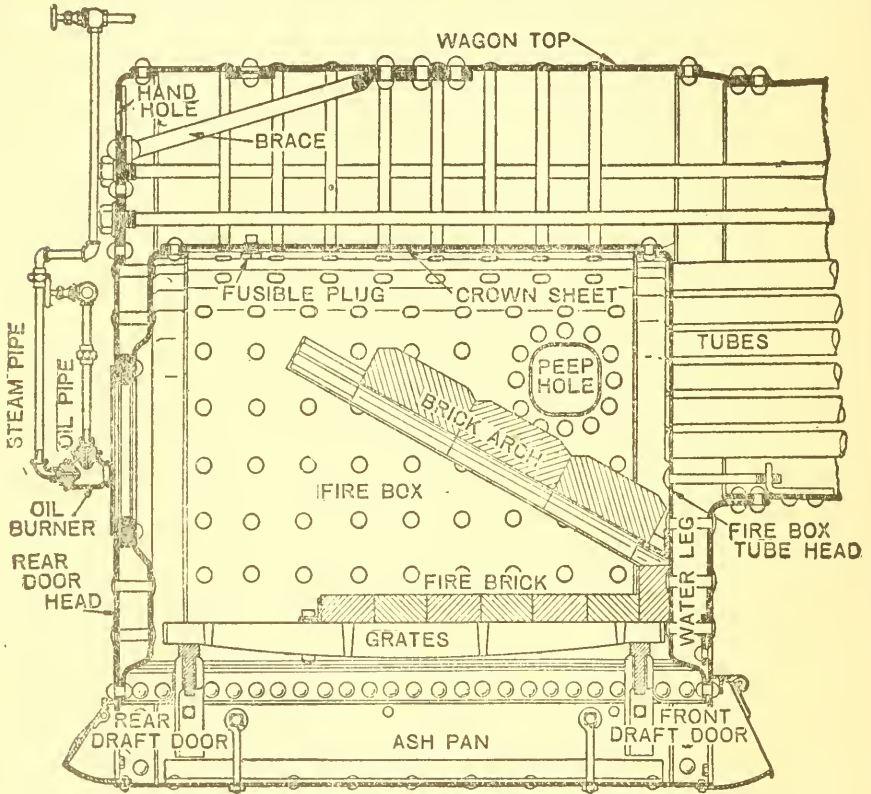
SECTIONAL VIEW OF FIRE-BOX FOR BURNING OIL.
